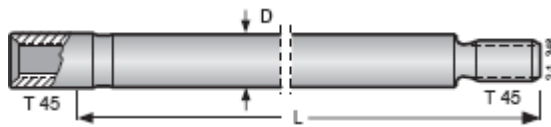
Carburized drill tube (*Top Hammer Drilling Tools Product Catalog*).
